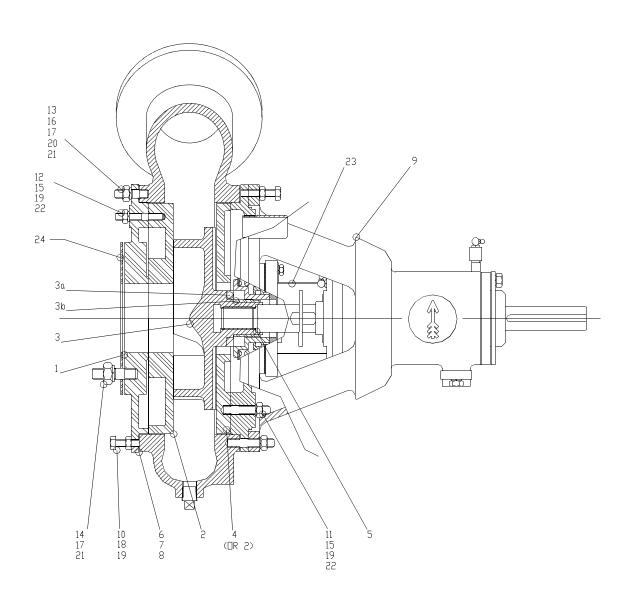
Impeller/Wear Plate Assembly - WP150 & GP100M
